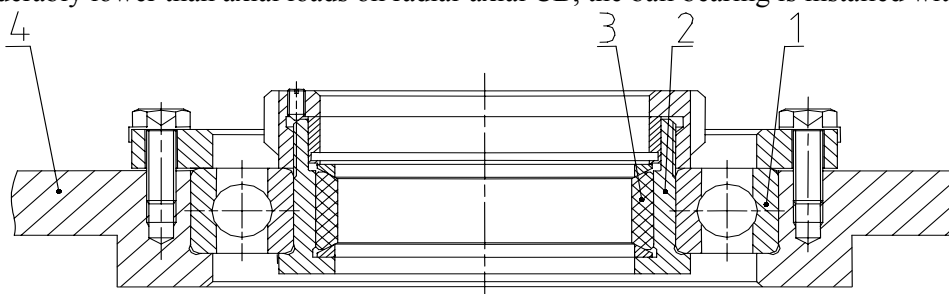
RADIAL-AXIAL CATCHER BEARING
